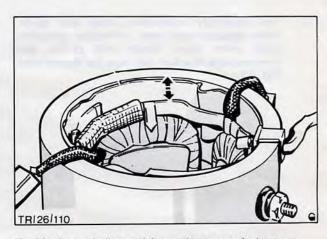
Arrows indicate minimum clearance to be between edge of field coil and end face of yoke
